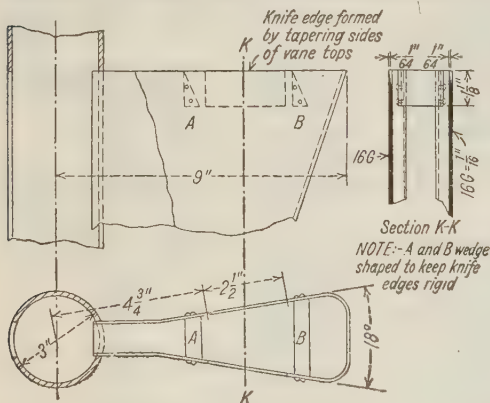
Arrangements of cutting edges in Vezin-type samplers.
